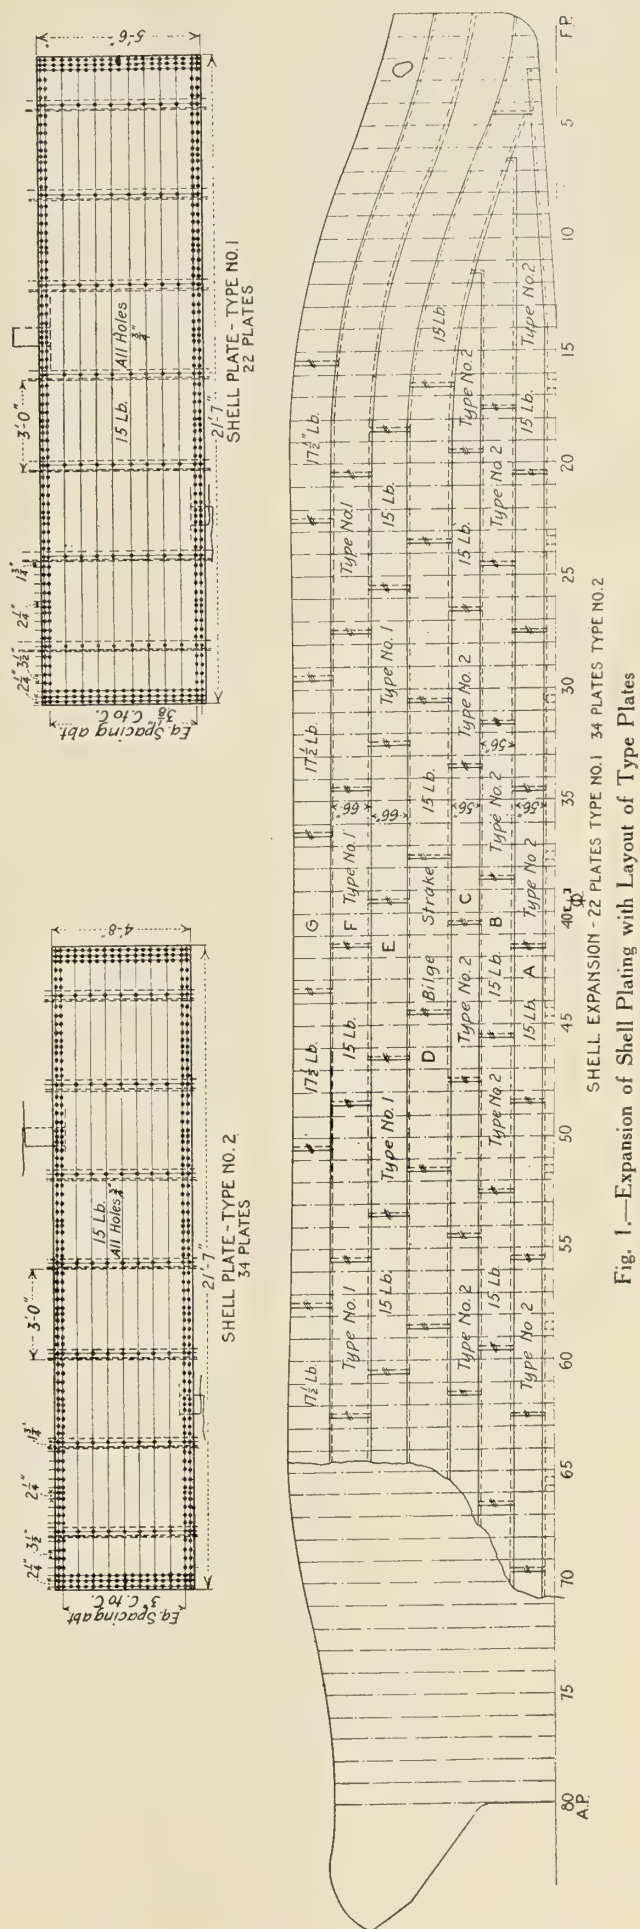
Expansion of Shell Plating with Layout of Type Plates
